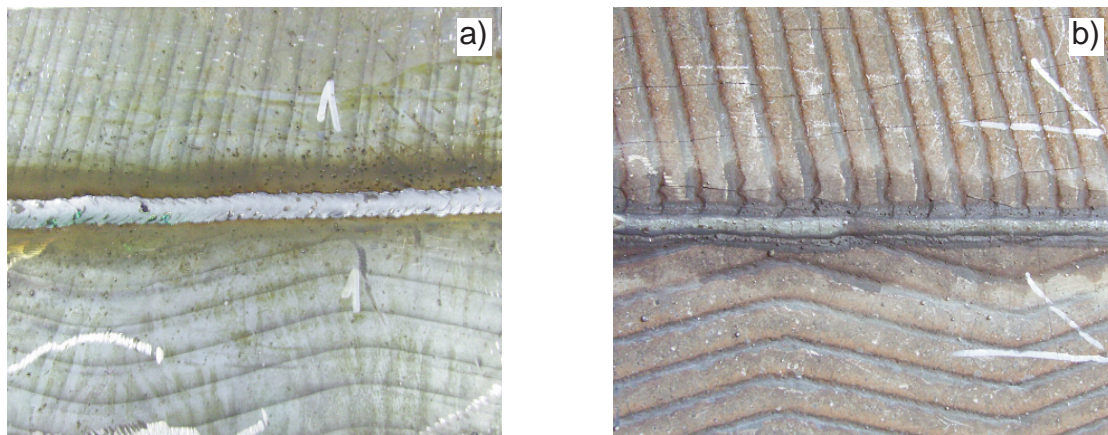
(a) Weld groove preparation of plates, and (b) welding sequence
